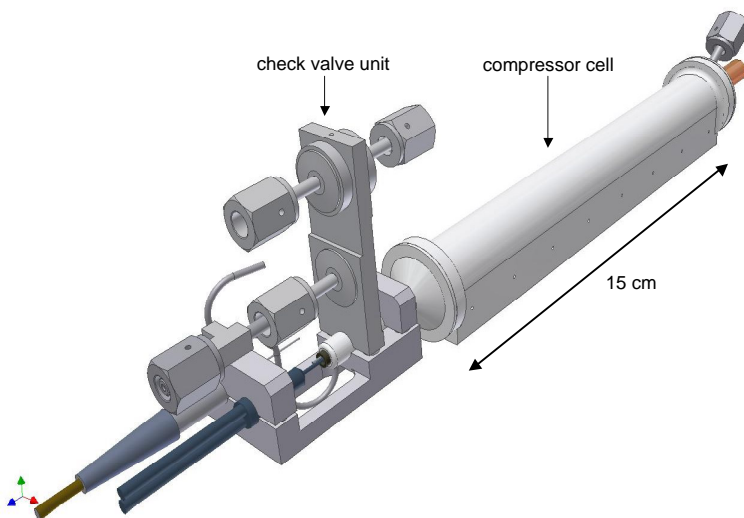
Design of a sorption compressor cell with integrated check valve unit.
